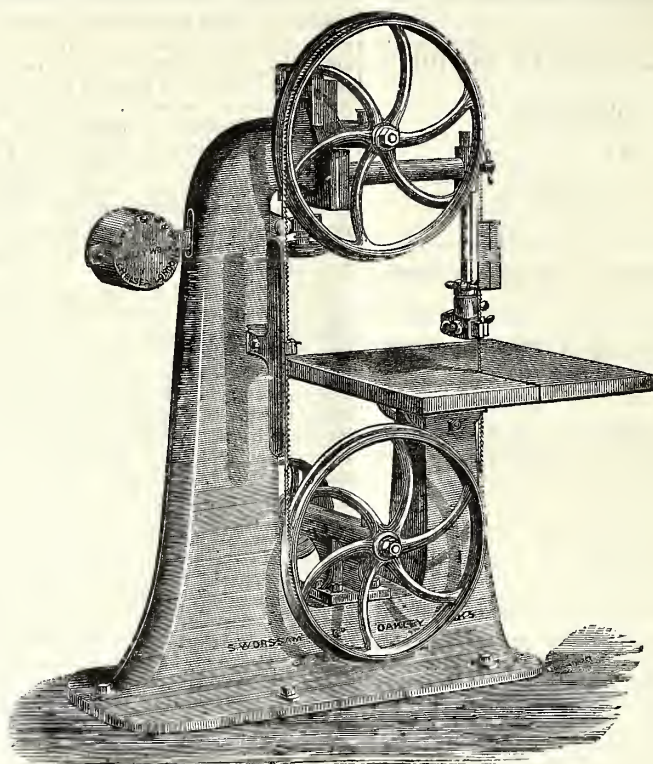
WORSSAM AND Co.'s BAND-SAWING MACHINE.
